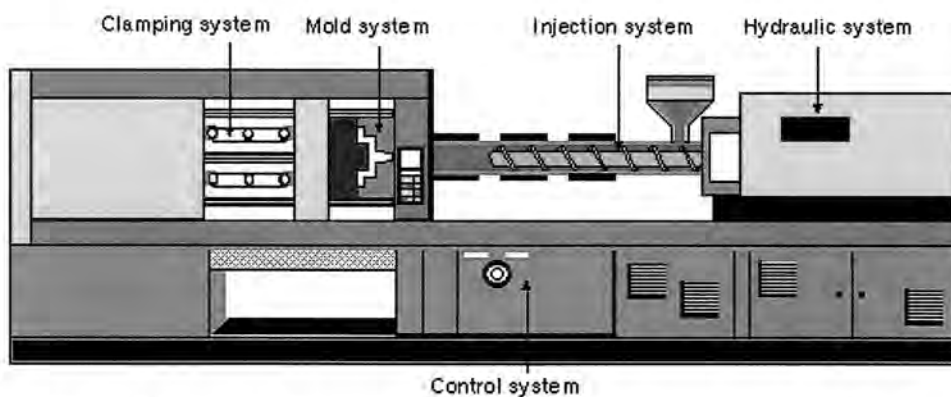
Injection Molding Machine with Component (PMOLDS, 2004)
